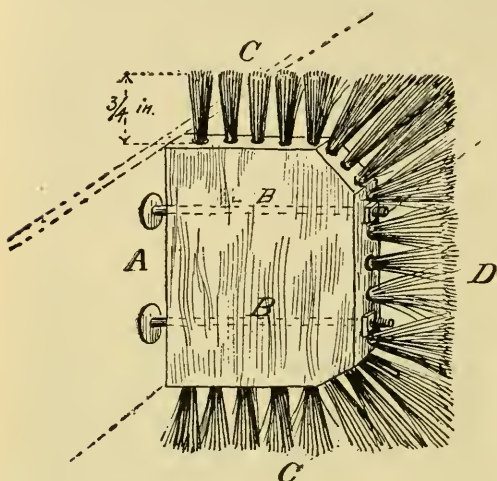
Elevator and belt brush for cleaning elevators infested by the Mediterranean flour moth. It is made by taking a piece of $1\frac{1}{2}$ -inch board of same dimensions as elevator cups, fastening bristles to three sides. Side A is fastened to elevator belt with flat-headed bolts running through board, as shown at BB, the bolts being $\frac{1}{4}$ or $\frac{3}{8}$ inch. Bristles on sides CC should be $\frac{3}{4}$ -inch long, but those at D should be longer, so that a good brushing to outside of elevator may be secured. Such a brush can be made to fit any elevator. (Chittenden.)
